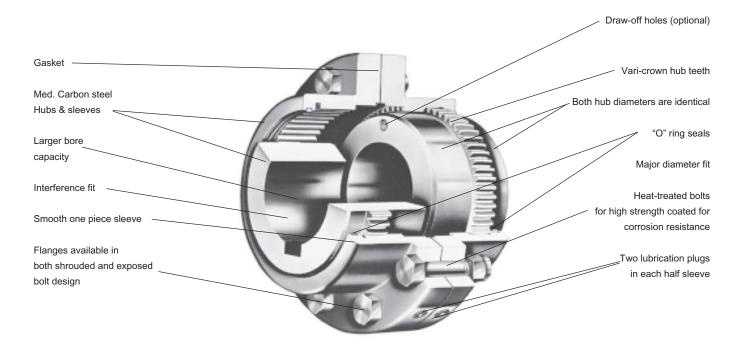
Cutaway diagram of an Emerson Grease-Packed Tooth coupling. Courtesy of Emerson Transmission Company.
